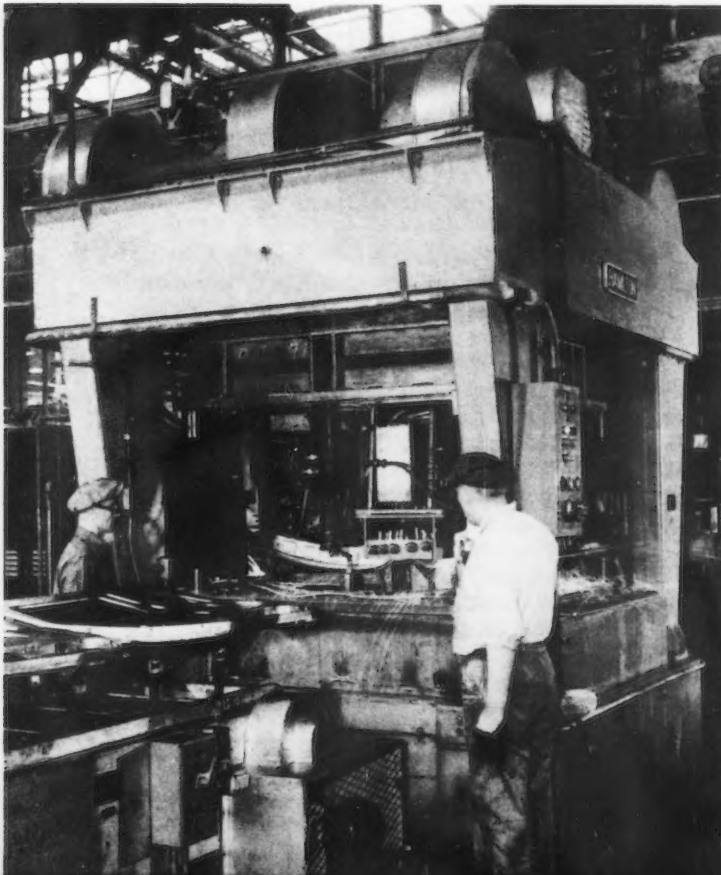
These welding dies are typical of many that are self-contained units readily removed and quickly replaced in welding machines. Only a few quick electric and hydraulic connections have to be made or broken when shifts are made.
